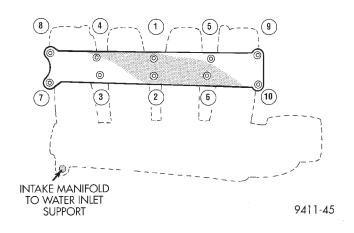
Intake Manifold Tightening Sequence—2.0L Engine
